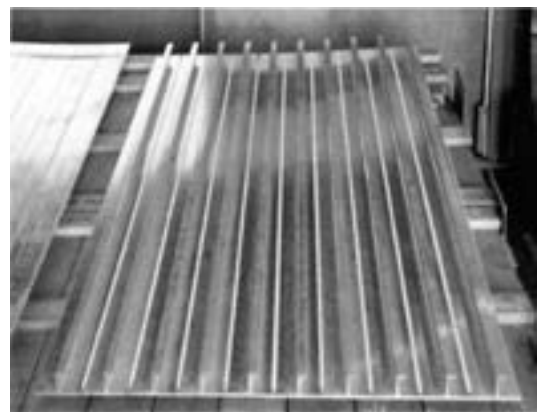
Friction stir welded large extrusion panel. (W : 1531mm, L : 2700mm)
